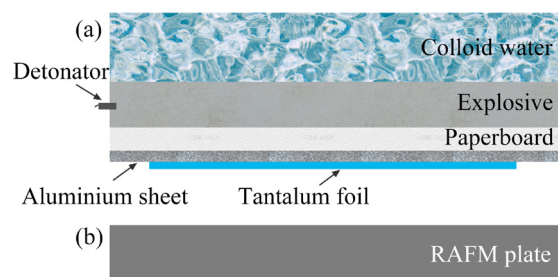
Schematic of explosive welding of Ta foil (a) and RAFM substrate (b)
